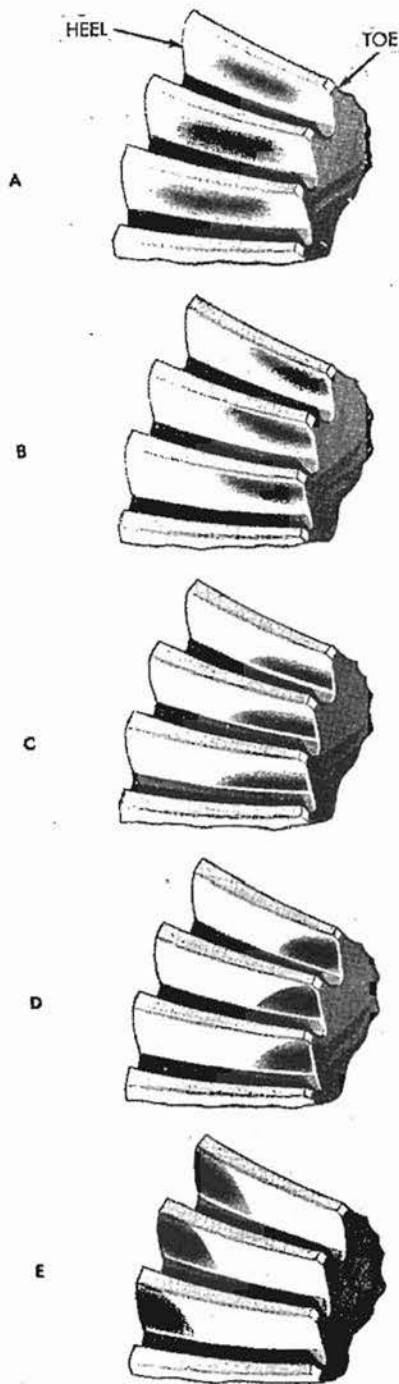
Correct and incorrect areas on drive side of gear teeth—front axle.
